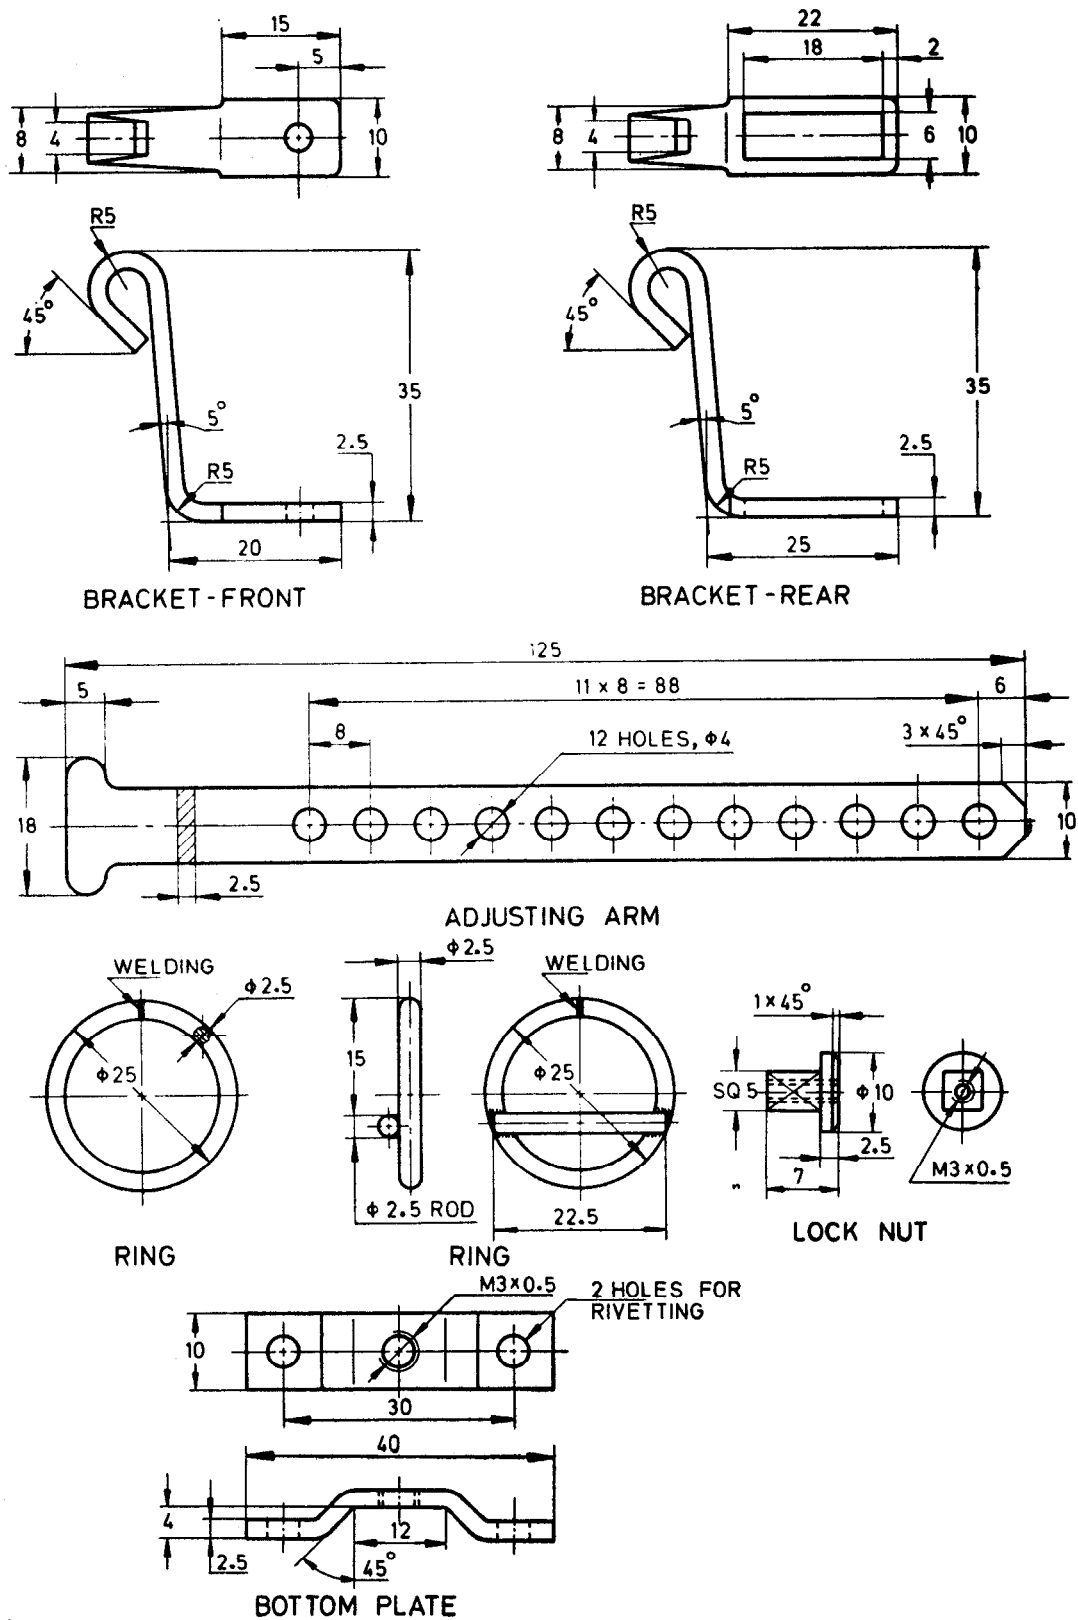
ADJUSTABLE CRAMPONS, TYPE B (LEFT)
